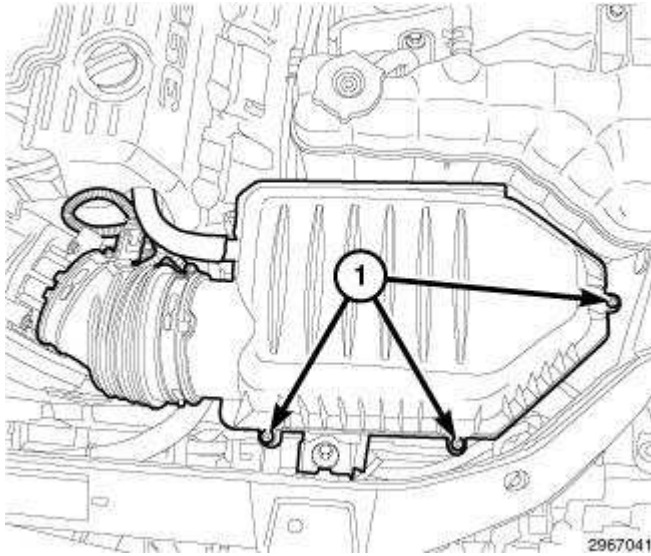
Air Cleaner Housing Cover Retaining Screws
